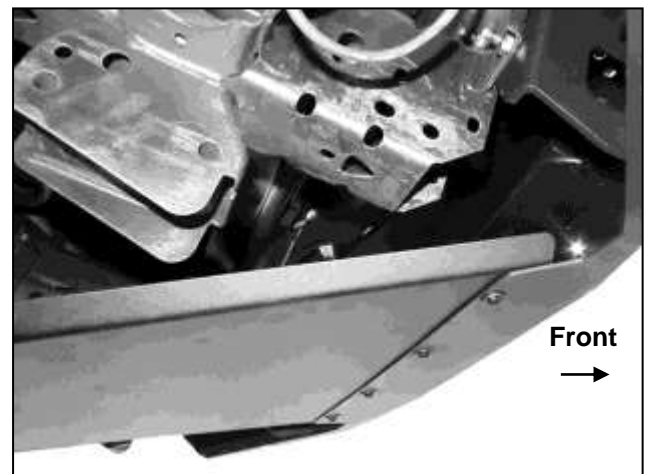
Attach Skid Plate to back of Bumper and bottom of cross member (see Figure 3)
